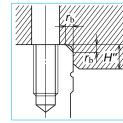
Shoulder for the Fig. 10 Shoulder for the ball rail datum face
